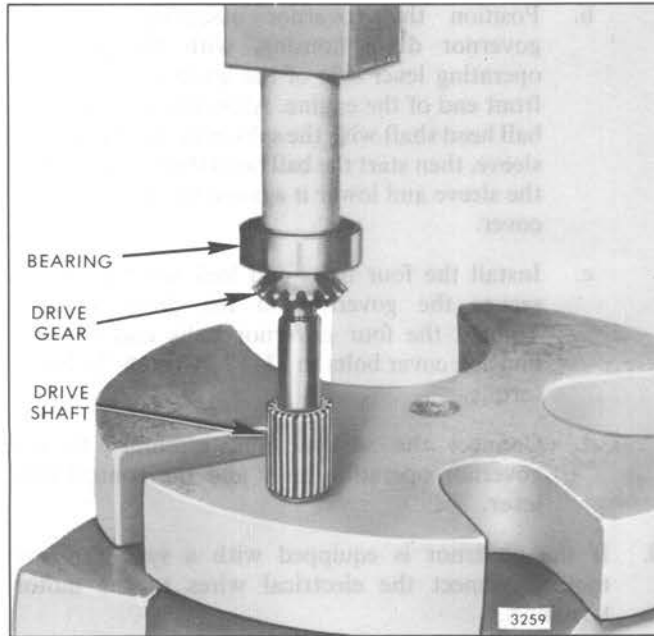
Installing Drive Gear and Bearing on Drive Shaft
